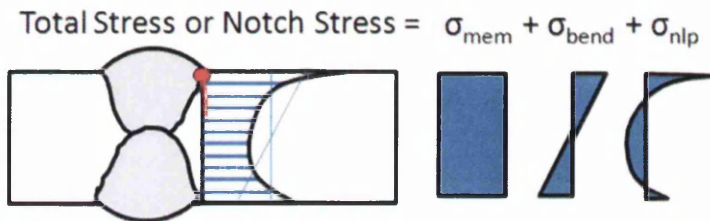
Total stress at a weld toe failure - membrane, bending and non-linear peak
